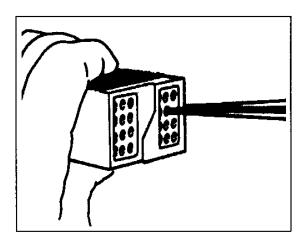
Pull Terminal/Wire Assembly Out of Connector
